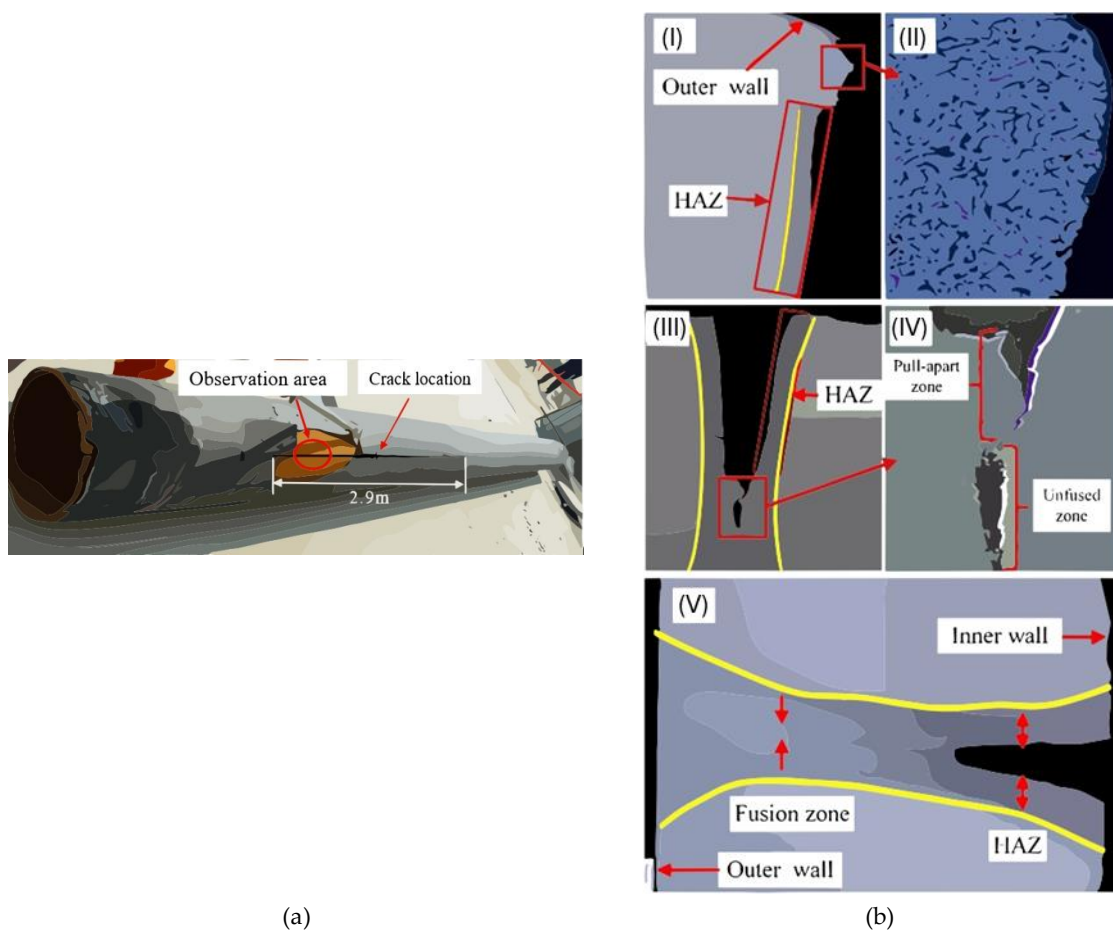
(a) Crack at the weld of pipeline. (b) The weld zones affected.
